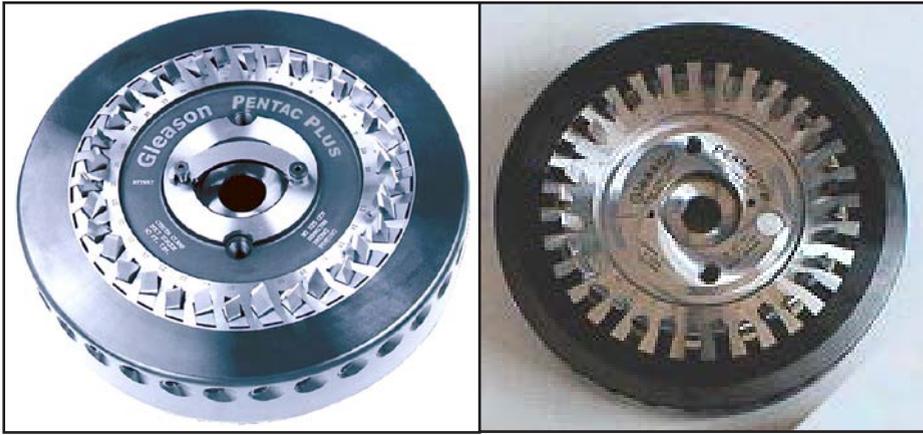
Pentac FH cutter head (left), and Pentac FM cutter head (right).
